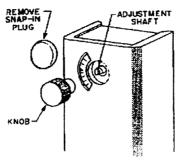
Drawing showing snap-in plug removed and the knob in line to assemble. Press the knob onto the slotted shaft.
